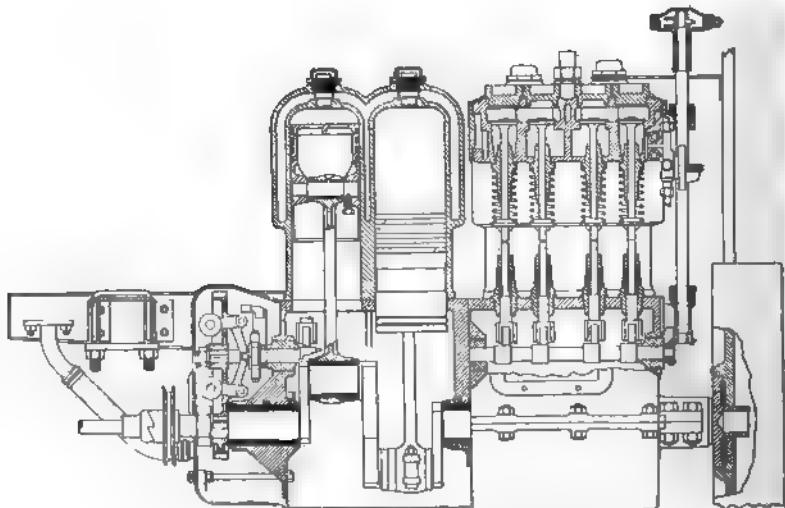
Part Sectional Elevation of the Packard Four-Cylinder Engine, showing method of driving the inlet and exhaust valves from a single cam shaft.
